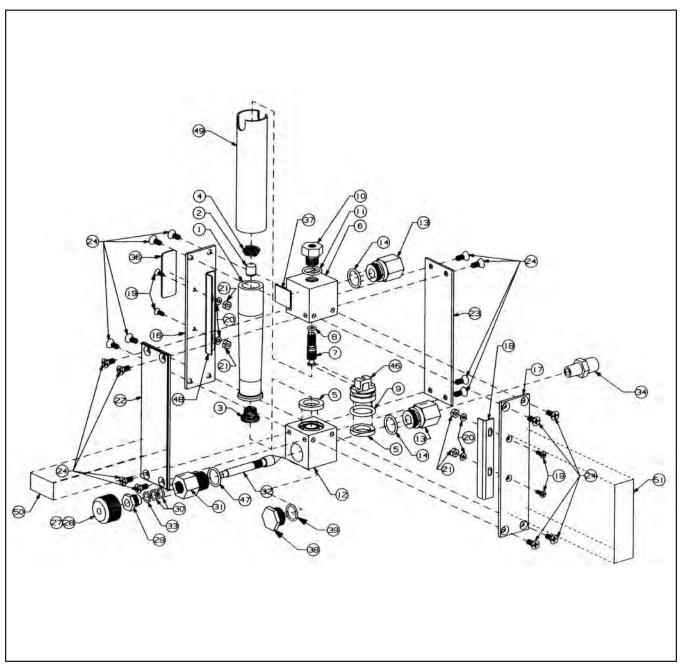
Exploded View, Size 8 Model 1358 Brooks Sho-Rate
